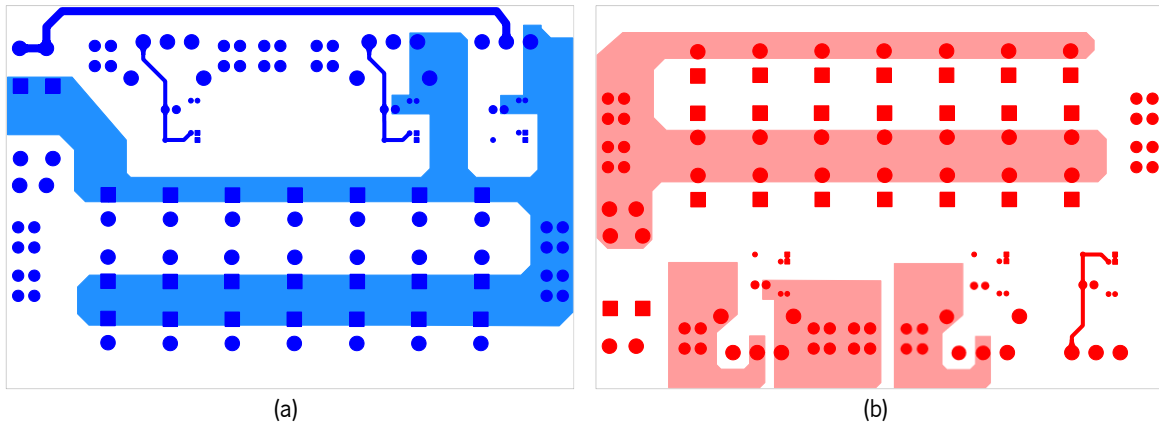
Power circuit PCB layout design: (a) Top layout; (b) Bottom layout.
